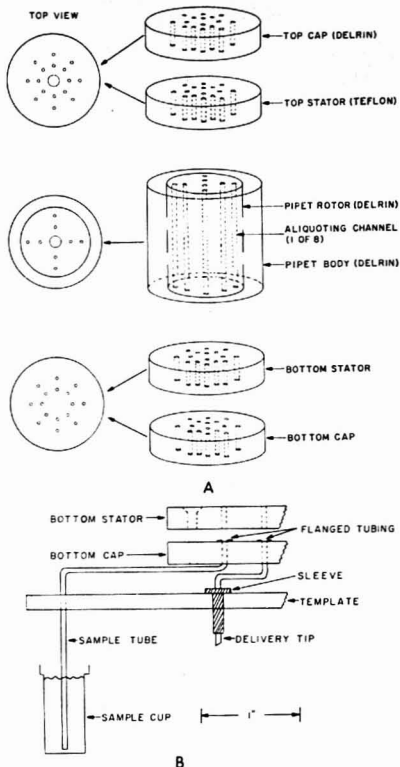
(A) Exploded view of multichannel pipet. (B) Close-up view of tubing alignment
